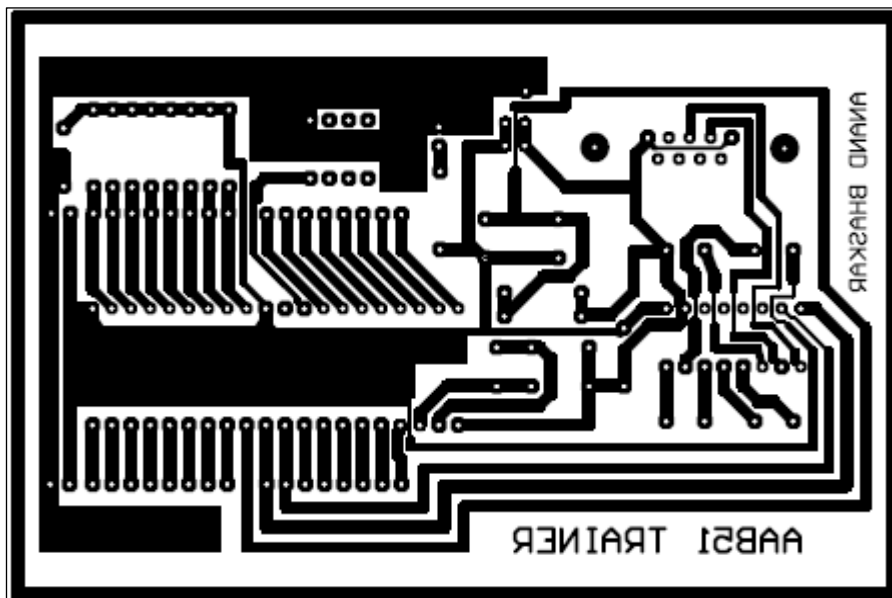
Solder side (bottom) PCB for the SU51MB.
